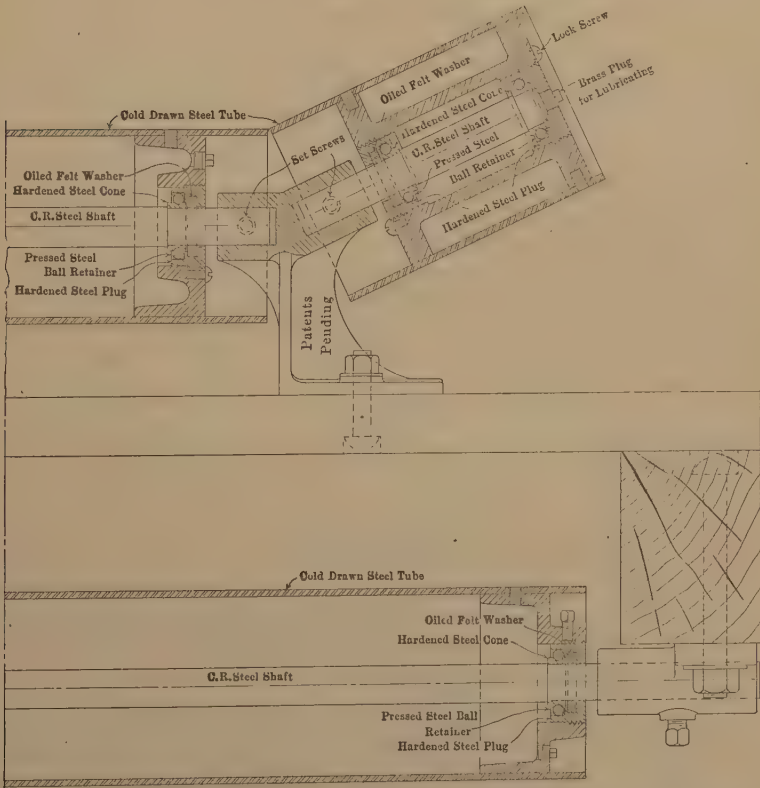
SECTIONAL VIEW OF "CONVEYING WEAVER" BALL-BEARING IDLER.
